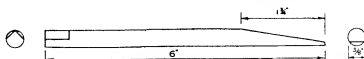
The  $\frac{3}{8}$ -in. diameter reamer
